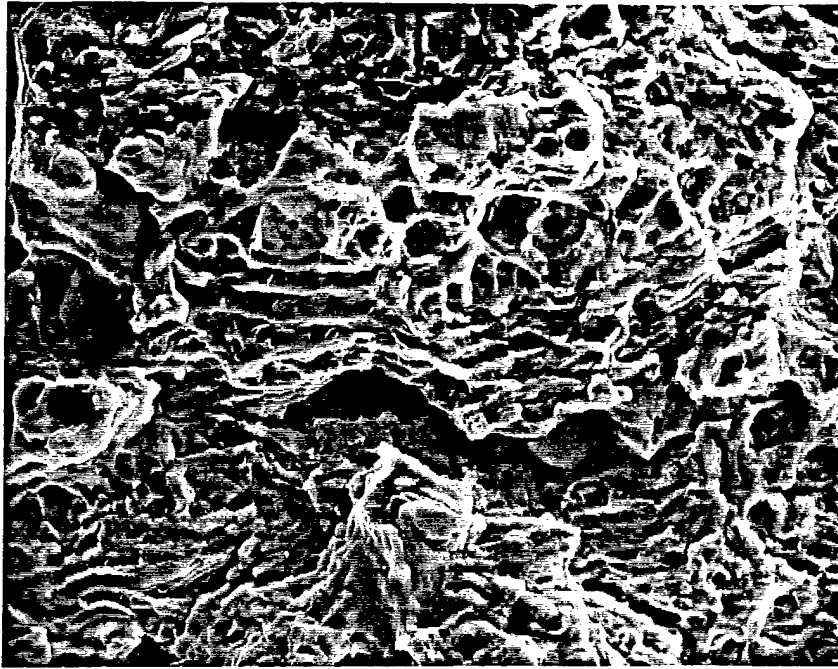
A Transgranular Morphology Mixed With Tearing on the Fracture Surface of PUR Rod -177 (Mag. 1kx).
